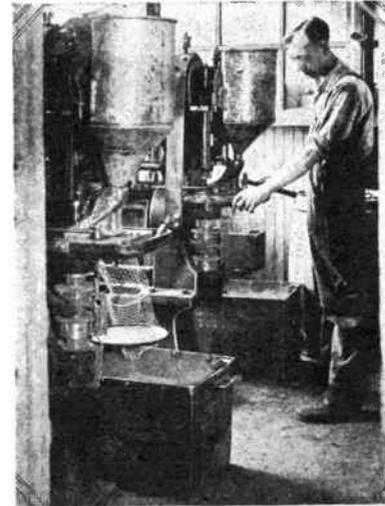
Pre-mold machines which prepare the Bakelite for the molding presses.
